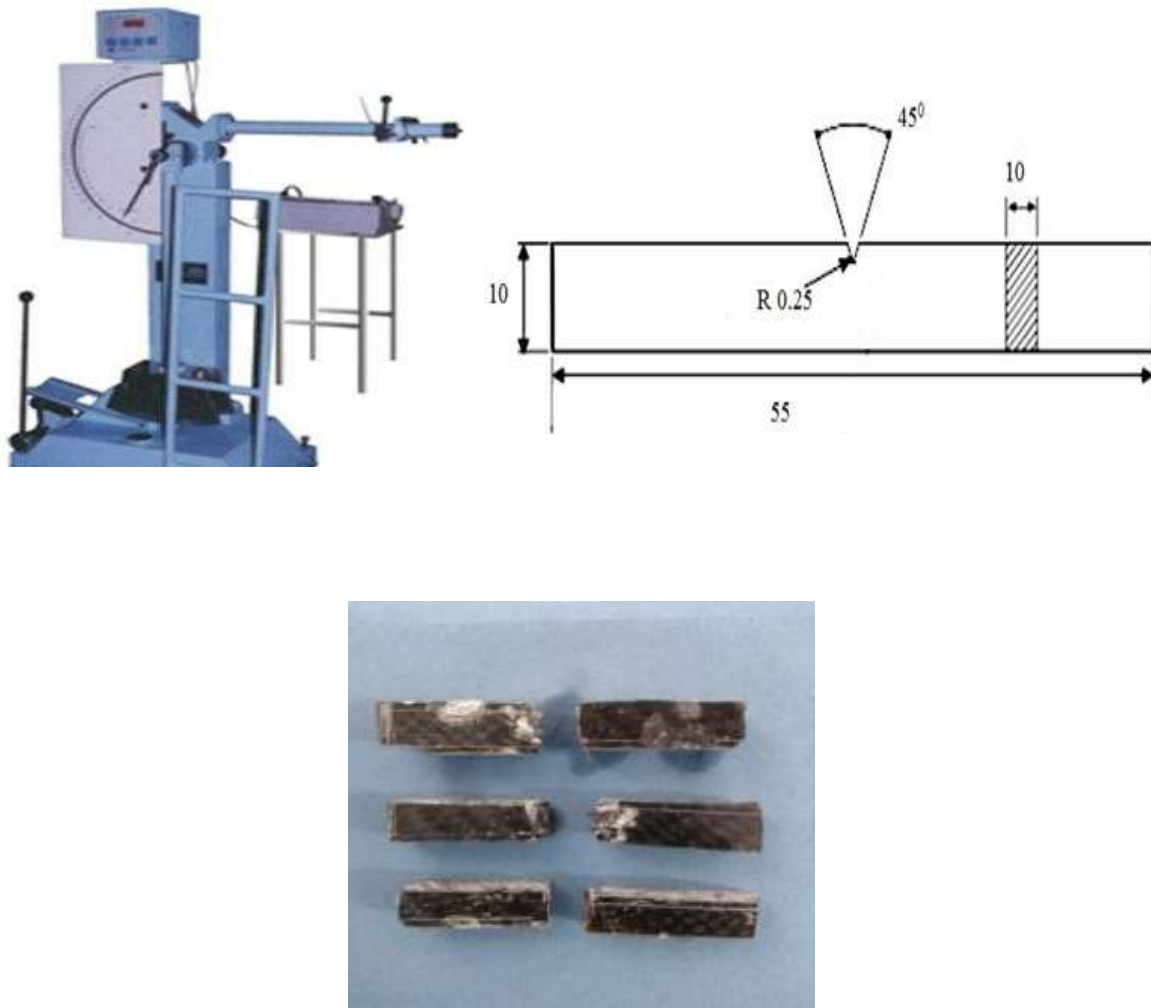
The images of (a) Impact testing machine, (b) dimension of standard specimen and (c) specimen after testing
